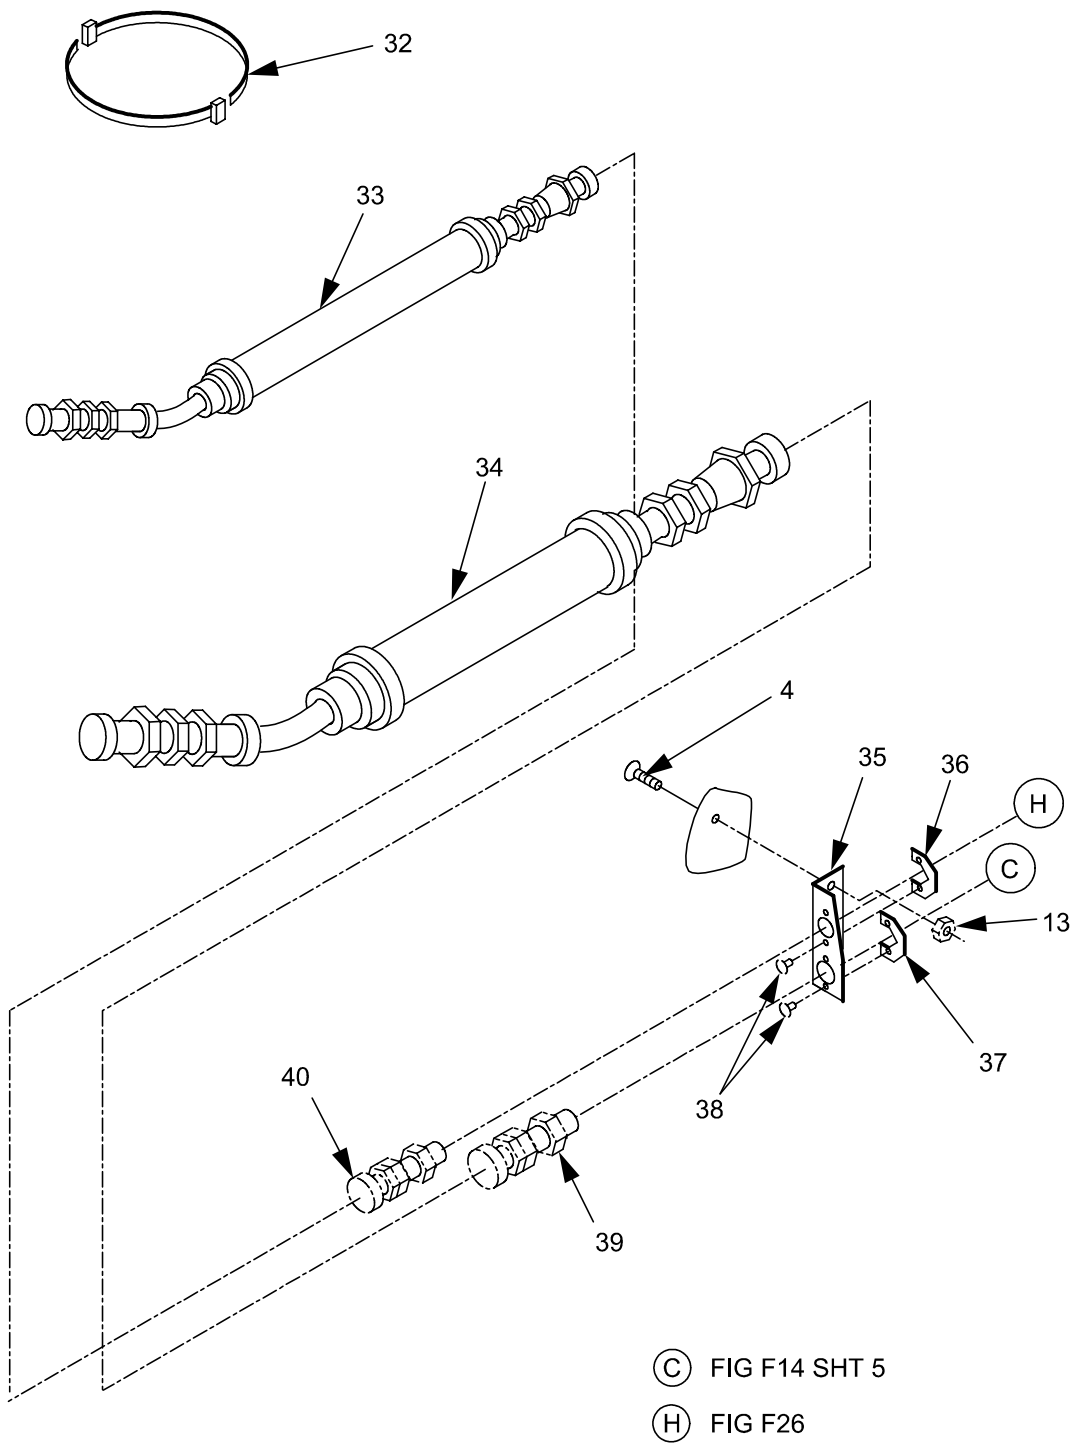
Condenser Assembly (Sheet 4 of 6)
